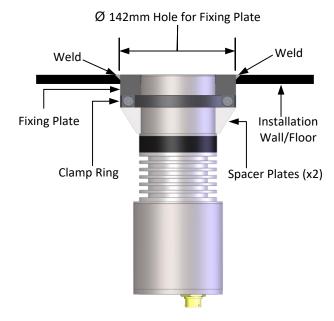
Sensor Installation (Fixing Plate Flush mounted)
